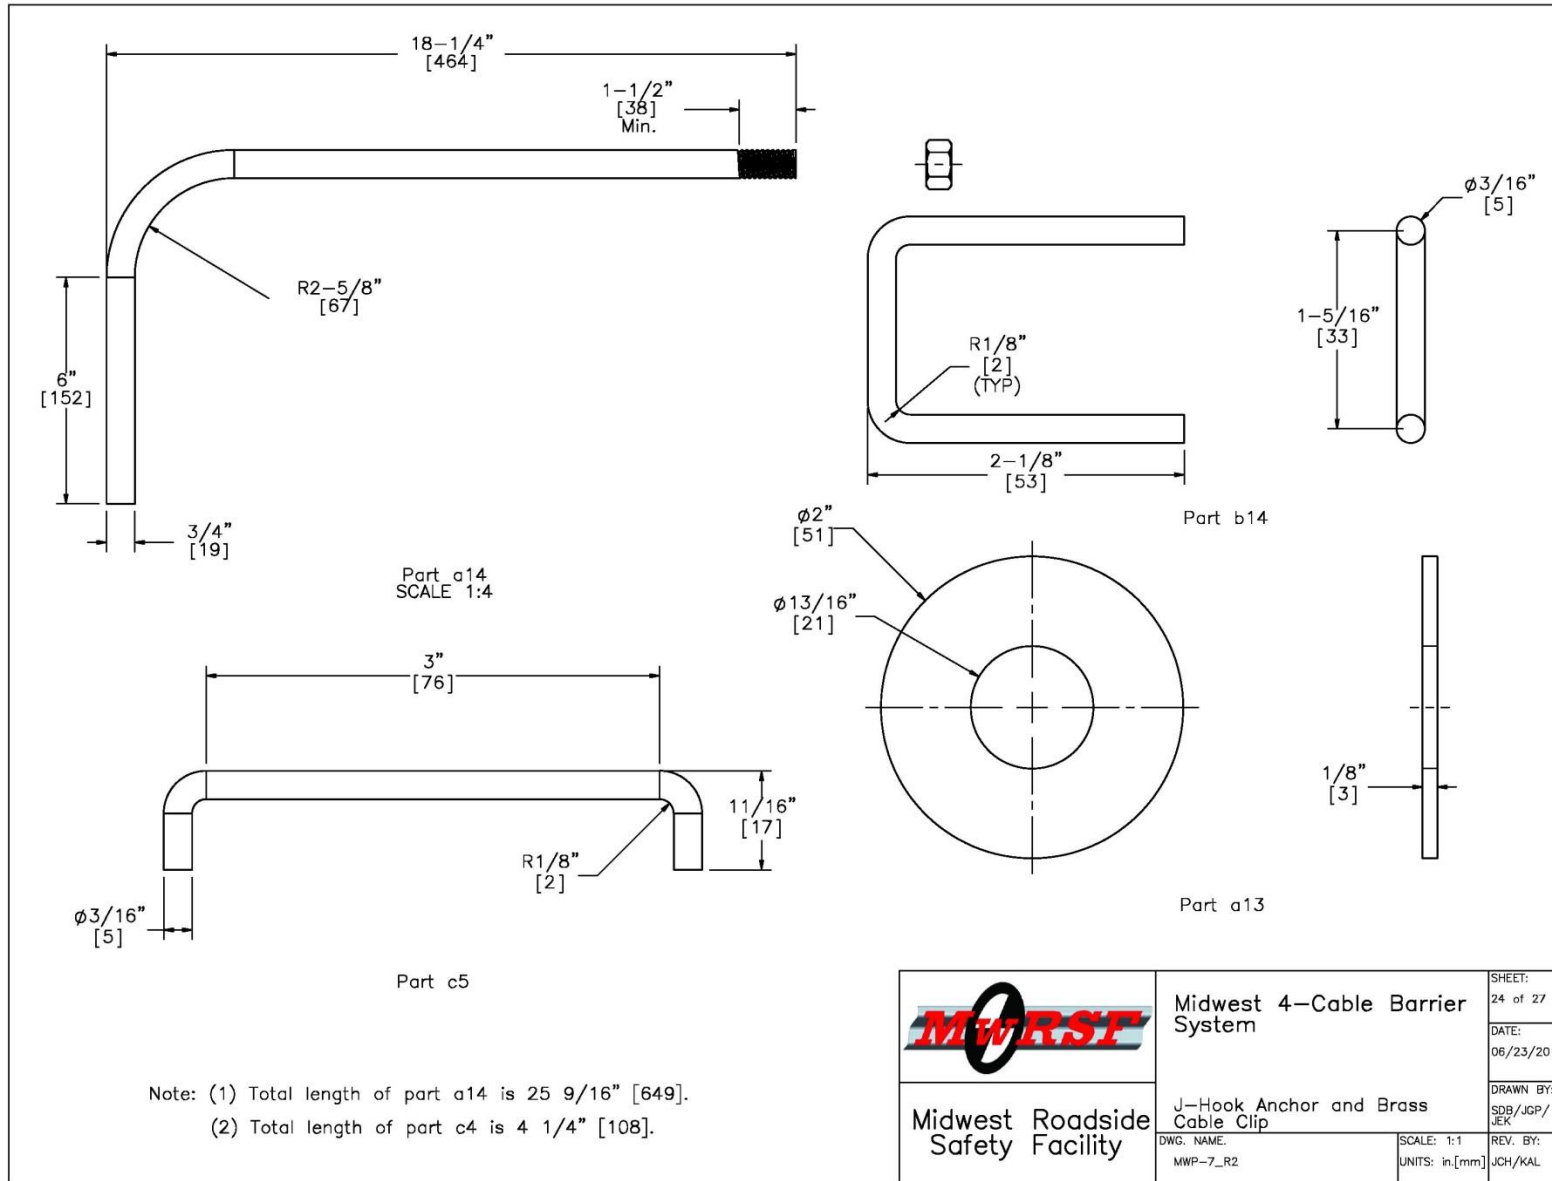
J-Hook Anchor and Brass Clips, Test No. MWP-7
